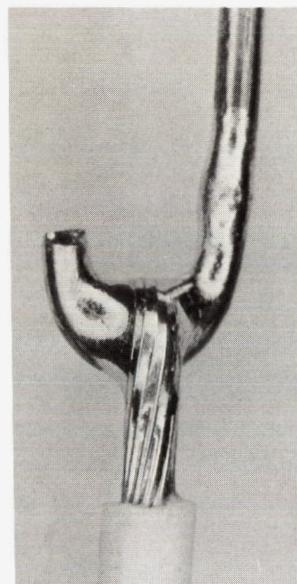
Soldered Connection Inspection Criteria
